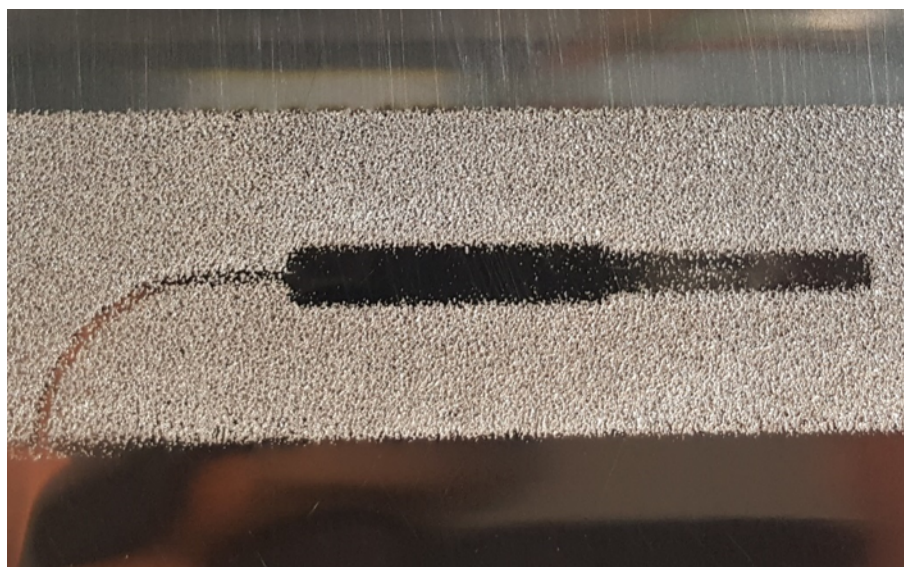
The welds over the lens and fiber show no tearing in foil and complete encapsulation. A smooth texture occurs above channels since no welding is occurring at those locations.
